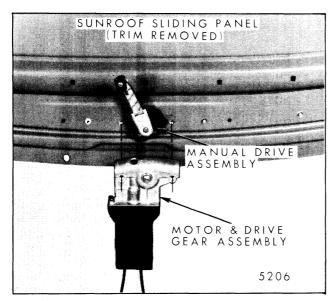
Manual and Power Drive Oriented (Module Removed from Vehicle)
